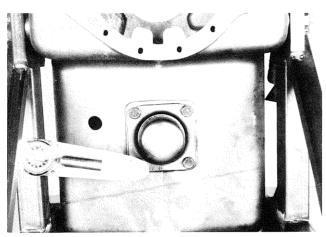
Install bearing cap bolts and washers. Tighten to specified torque. (See torque chart)
